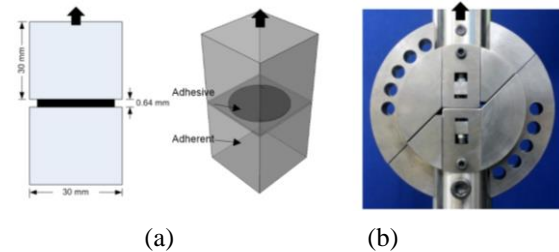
(a) Adhesively bonded specimen geometry and (b) modified Arcan jig setup for tension test of the specimen
